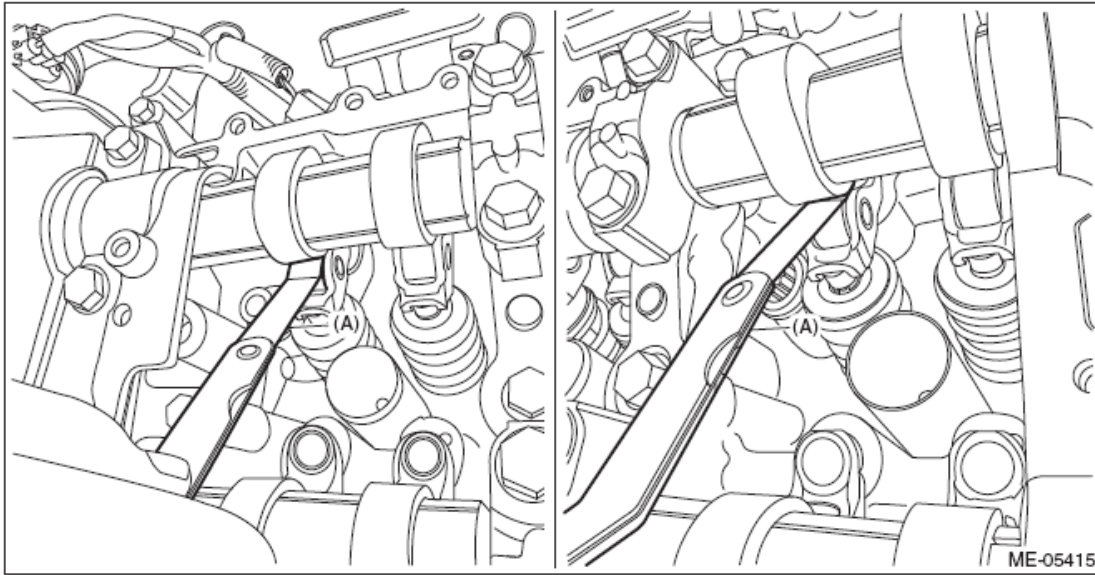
Checking No. 2 And No. 4 Cylinder Cam Clearance
